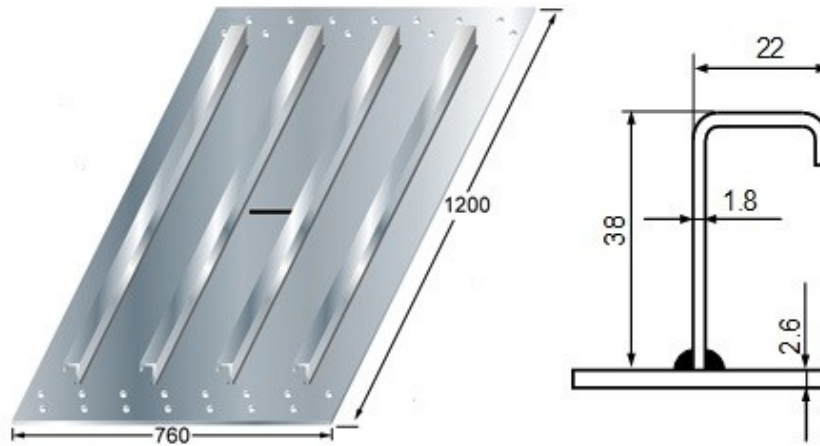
Dimensions of the 4-stringer panel made of 6156 T6 (LB welded by AIRBUS).
